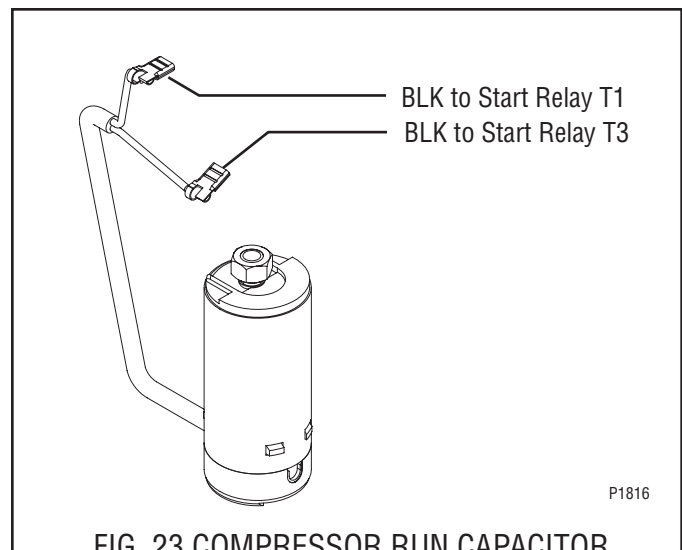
COMPRESSOR RUN CAPACITOR TERMINALS
